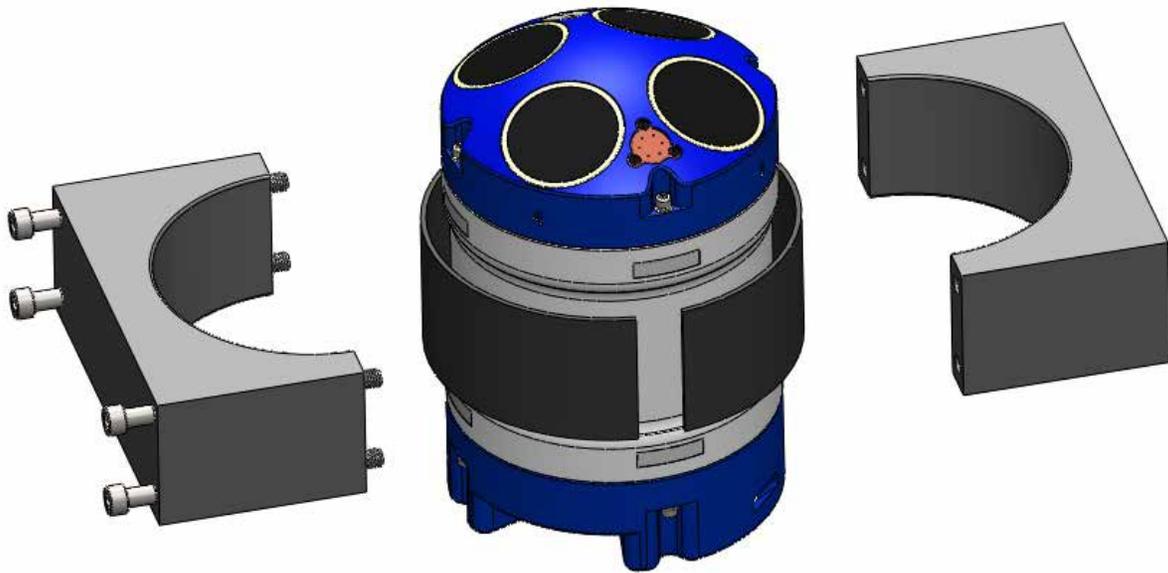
81D-5000 Mounting Clamp Adapter Kit
